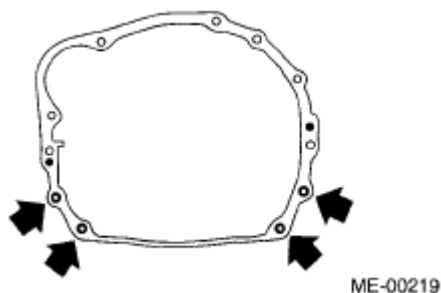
Locating Bolts And Nuts Holding Lower Side Of Transmission To Engine
